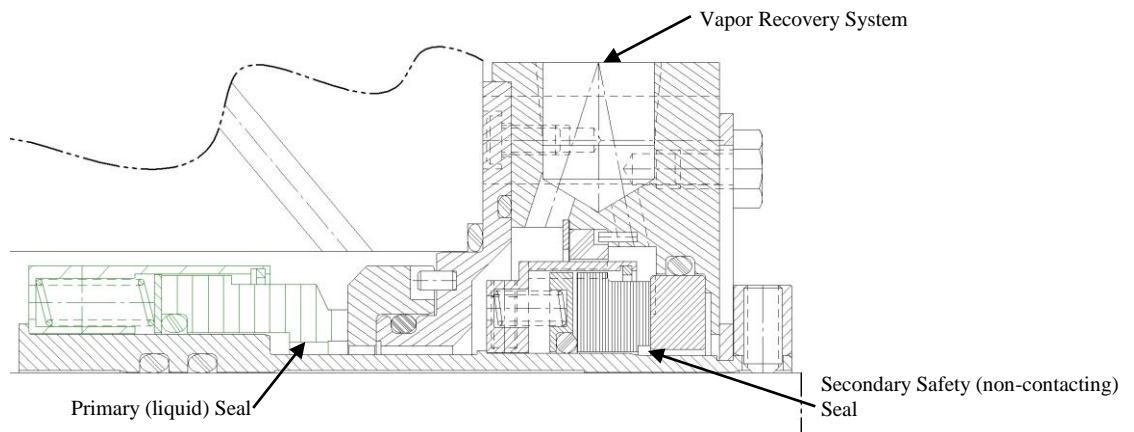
Typical dual unpressurized pusher seal arrangement using a non-contacting safety containment seal outboard
